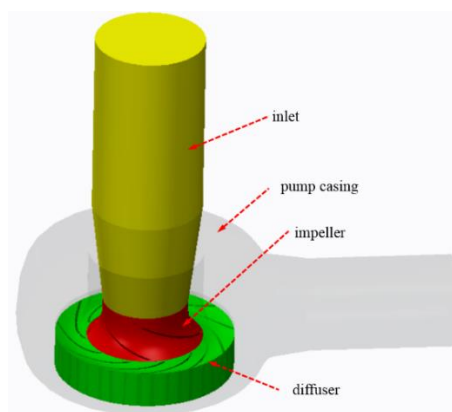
Reactor coolant pump hydraulic component three-dimensional model.
